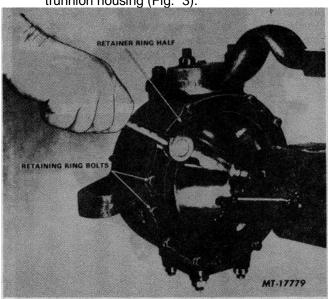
Removing Retaining Ring Half (Halves) Mounting Bolts
